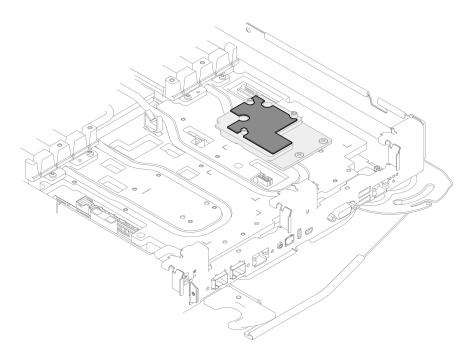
ConnectX-7 NDR 400 riser assembly interface plate single-use gap pad
